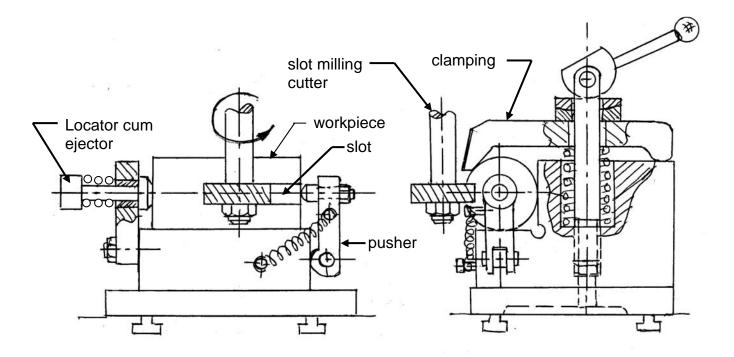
(b) Fixture for milling the slots on the rod.
